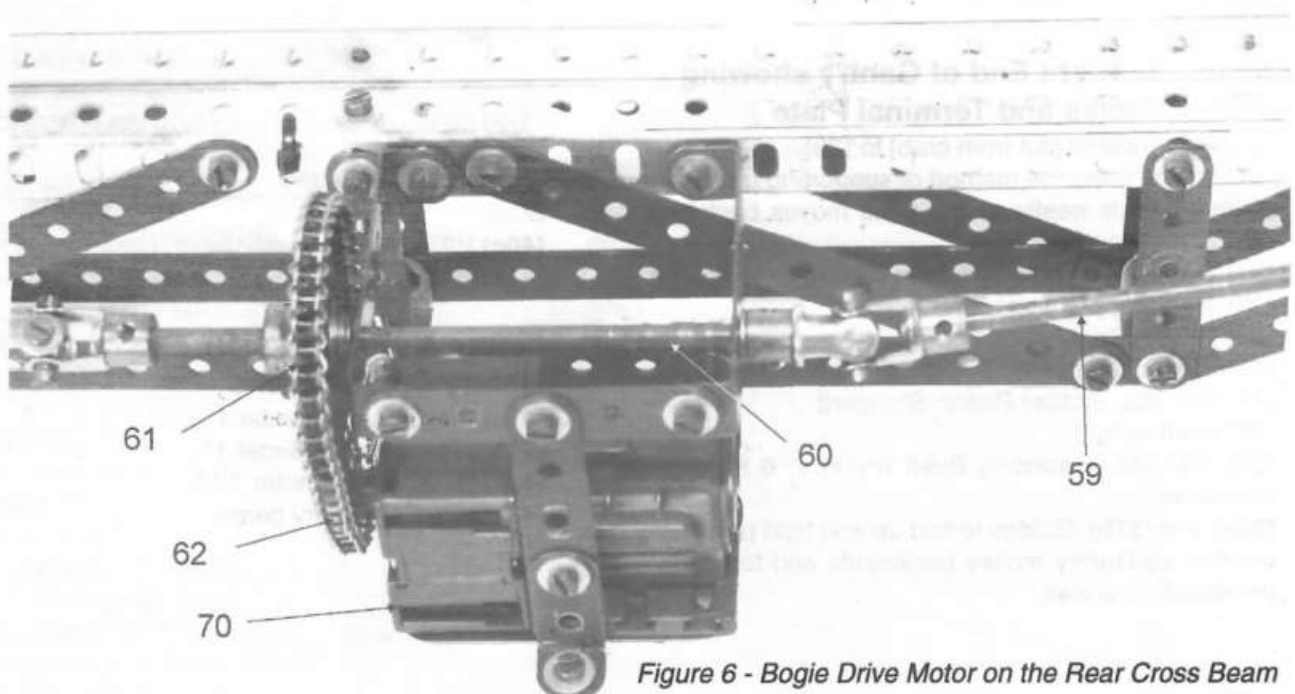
Bogie Drive Motor on the Rear Cross Beam
